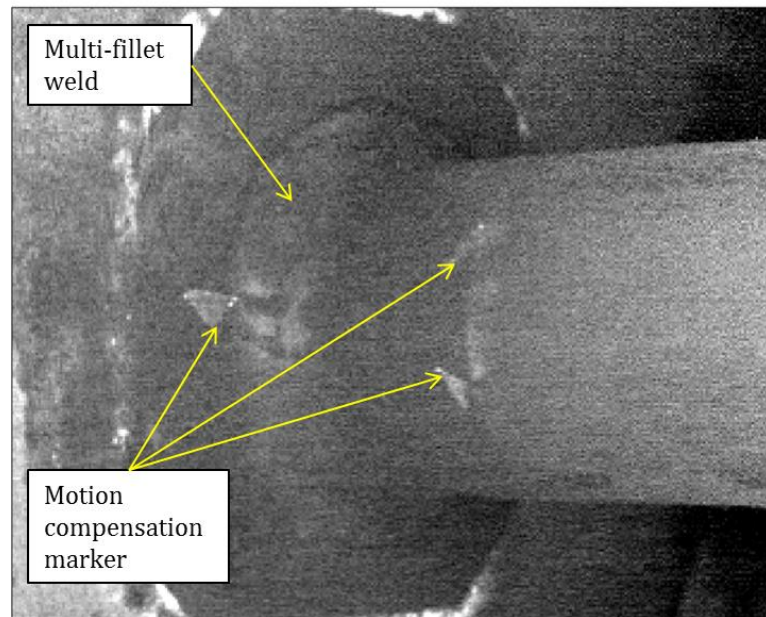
A thermal image of the butt weld at the end of pipe 1 with motion compensation markers attached.
